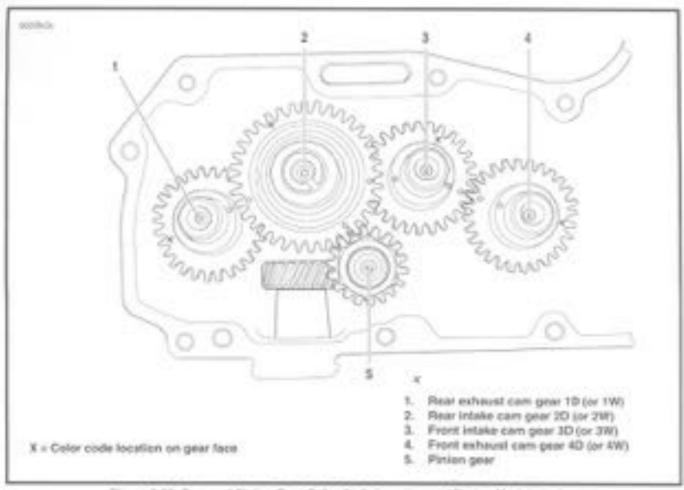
Cam and Pinion Gear Color Code Location and Timing Mark Indexing
